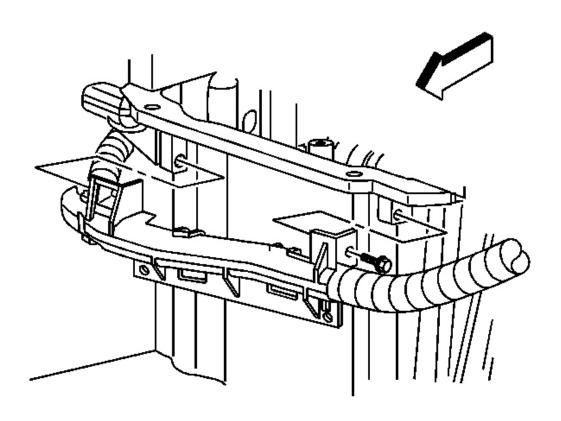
View Of Battery Cable Channel & Bolt Courtesy of GENERAL MOTORS CORP.
